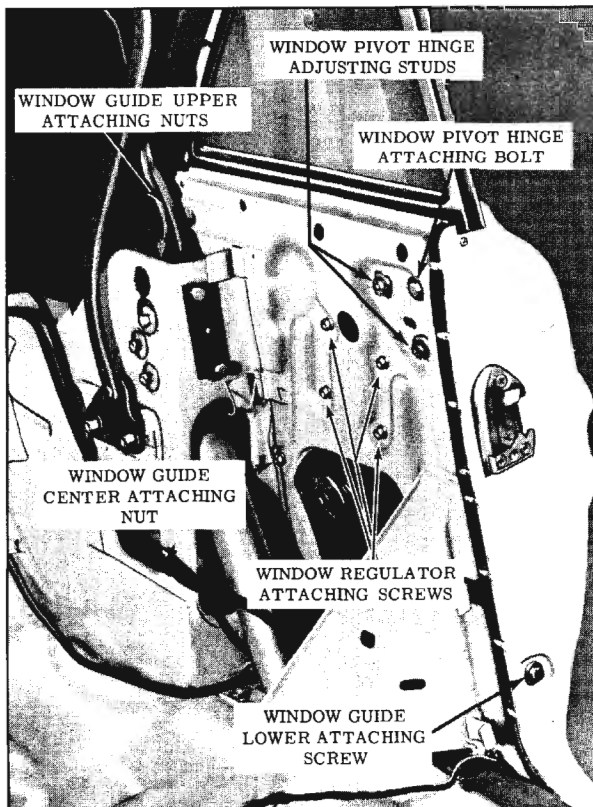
Rear Quarter Hardware ("67" Styles)
